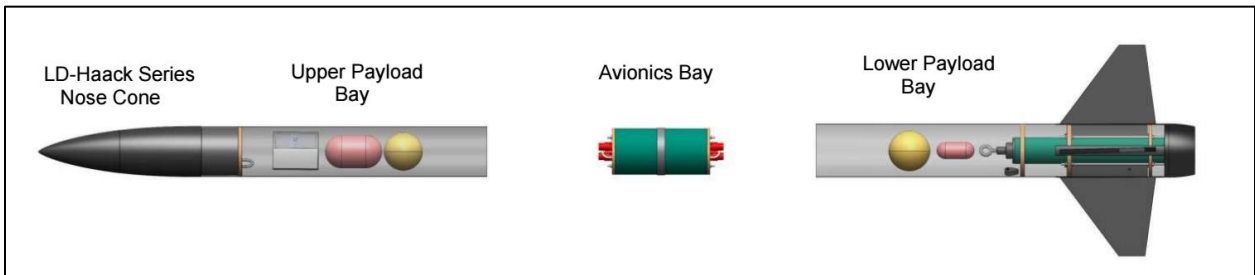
Launch Vehicle Exploded/Transparent Assembly
